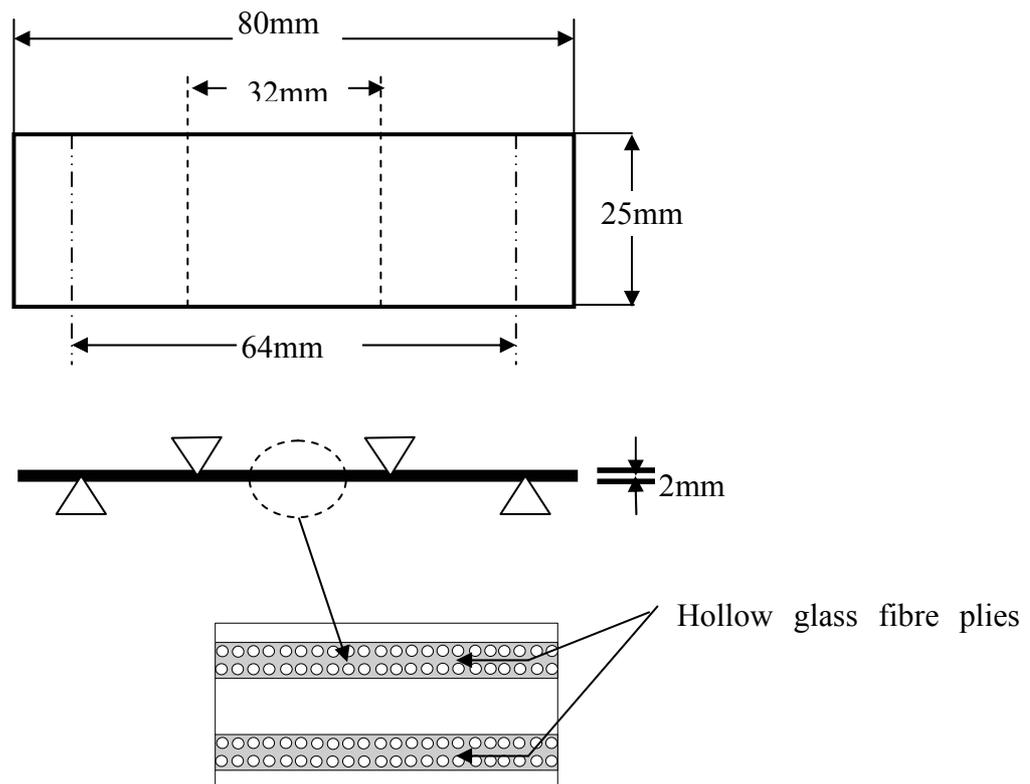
Lay-up configuration and dimensions for 4-point bend flexural testing.
